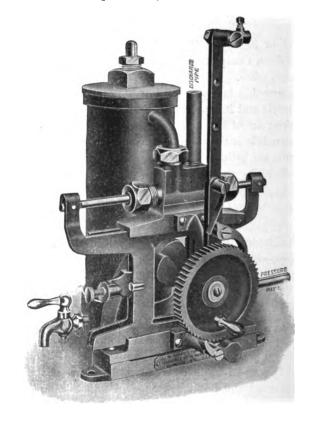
ASSEMBLAGE VIEW OF PUMP.
